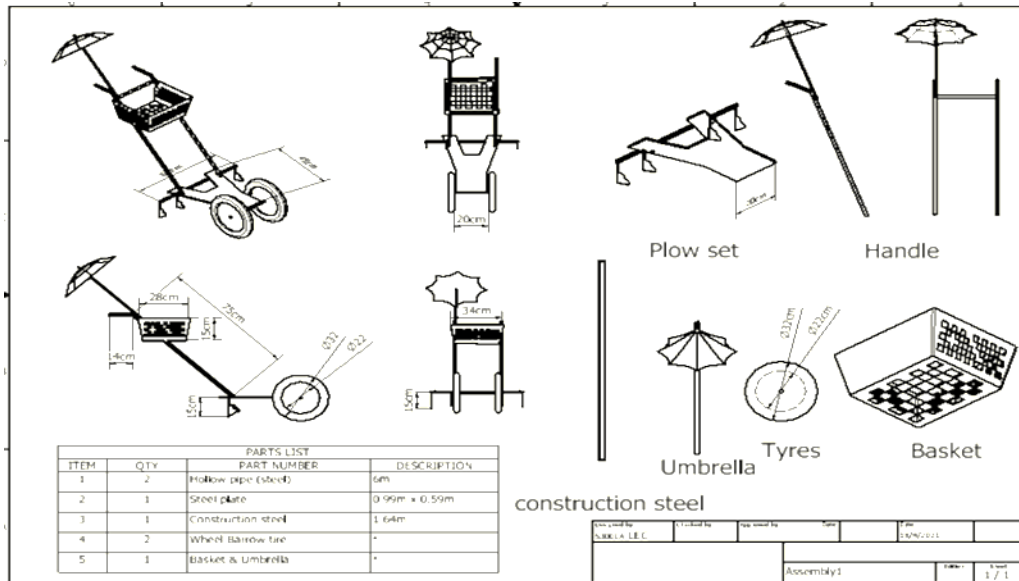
Design of wheel hoe was illustrated using Auto Desk Inventor
